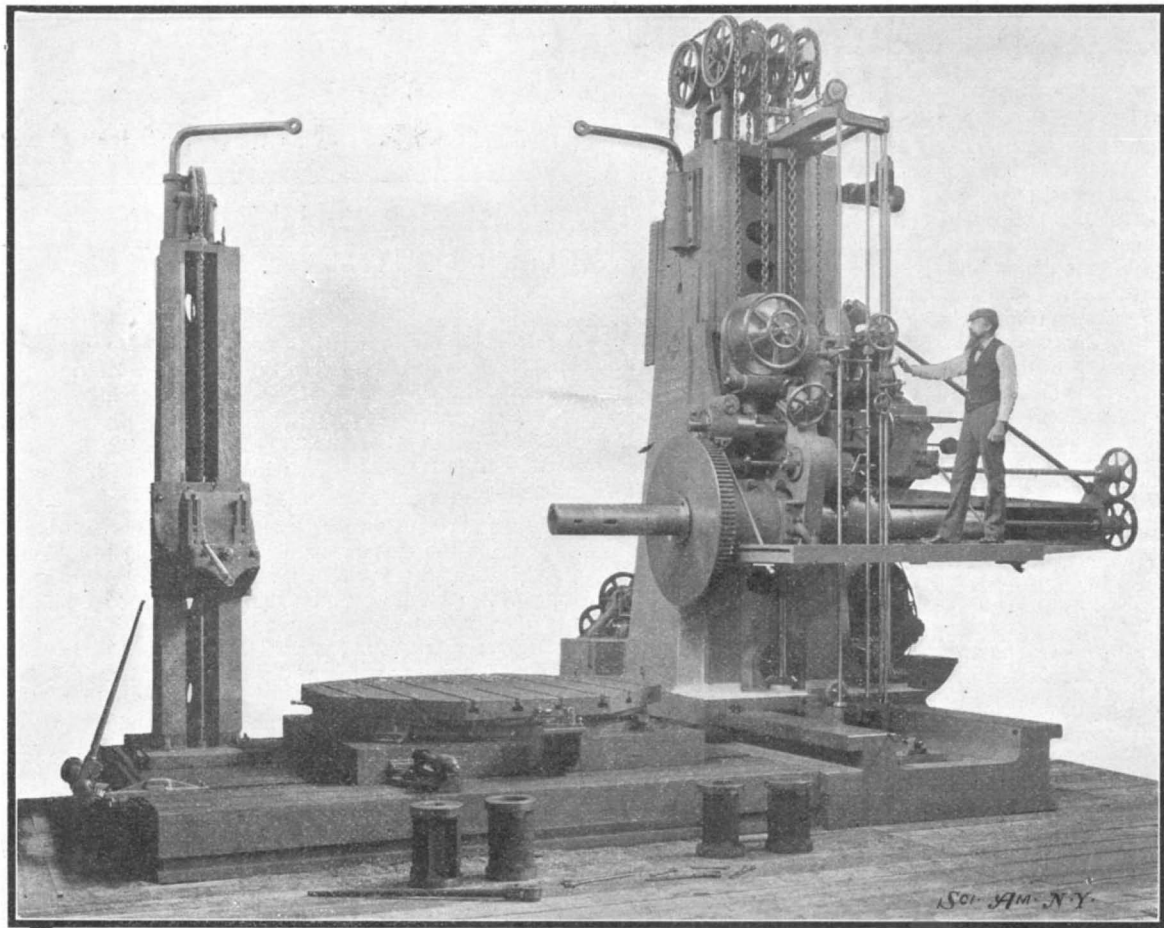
HORIZONTAL BORING, MILLING, AND DRILLING MACHINE CAPABLE OF DRILLING DOWN TO $1\frac{1}{2}$ INCH AND OF BORING CYLINDERS UP TO 60 INCHES.
